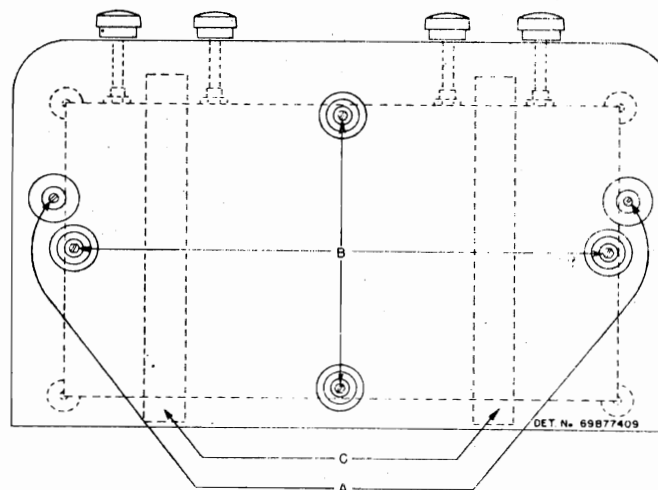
SHIPPING STRIP REMOVAL DETAIL
